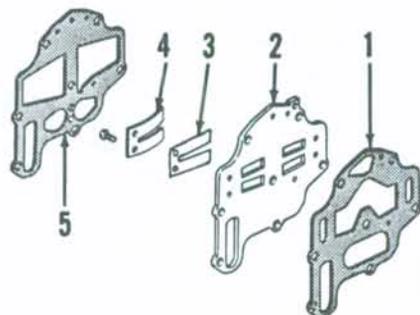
Exploded view of inlet leaf valve plate and associated parts.
